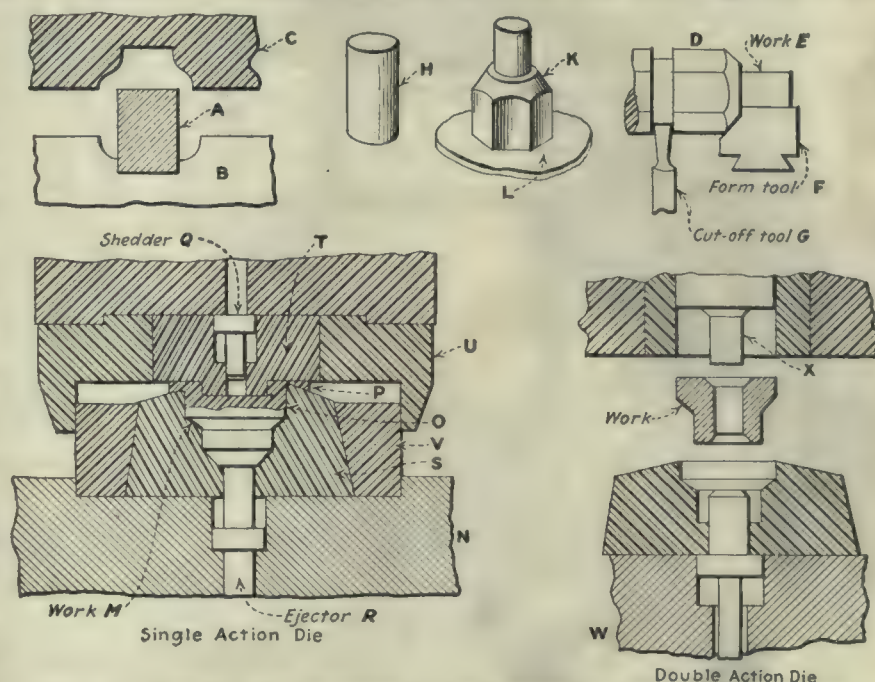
METHOD OF FORGING BRASS, SHOWING TYPE OF DIE USED
